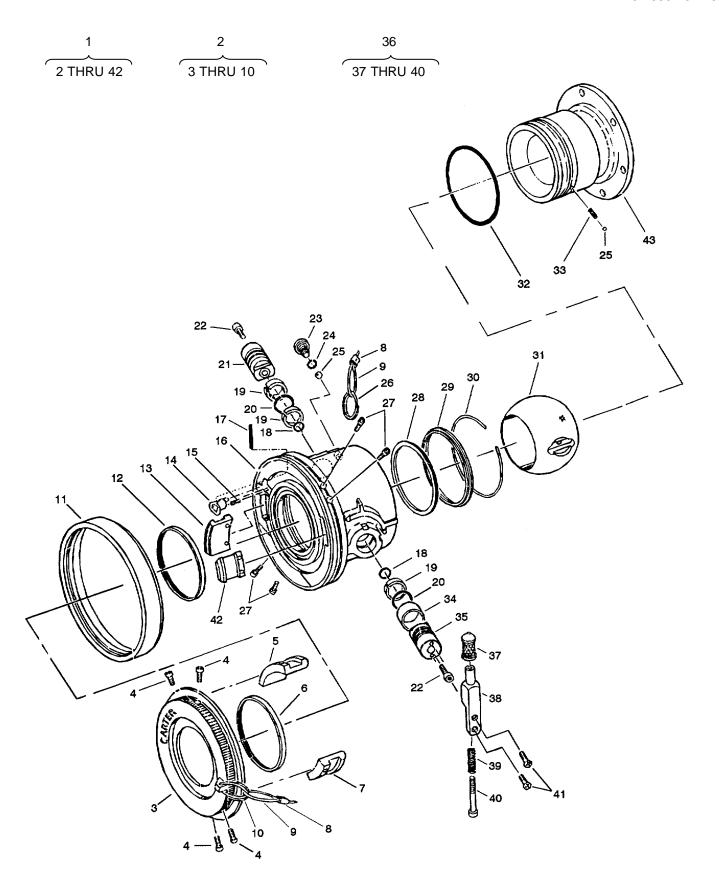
Unisex Coupling, 3-Inch, Flange Mount
